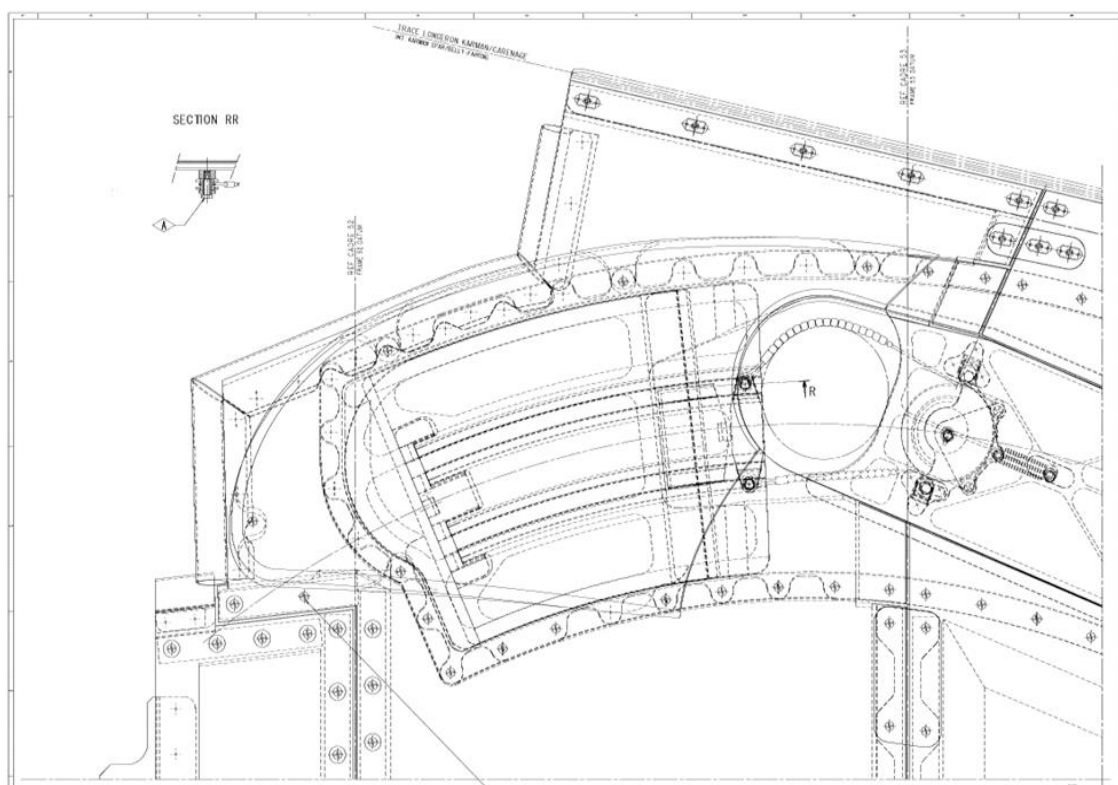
View from drawing on flap retracted position –both panels being superimposed
